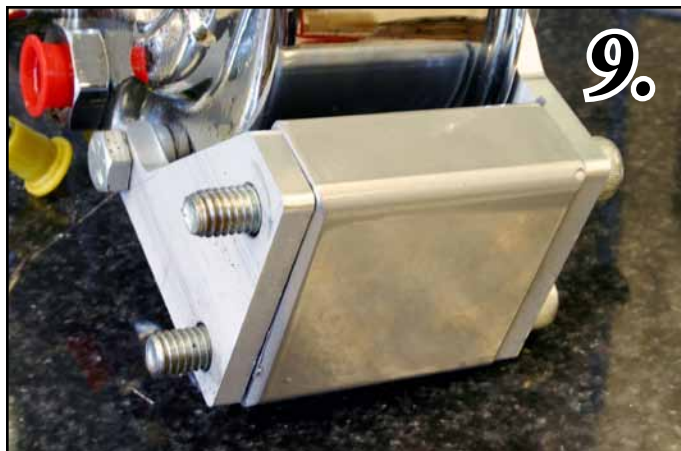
Use the (20115-C) Spacer Block between the two brackets. Install the unit to the lower right (drivers side) engine block tapped holes with (2) $\frac{7}{16}$ x $3\frac{1}{2}$ " SHCS (S364). Then install the Power Steering pulley.
